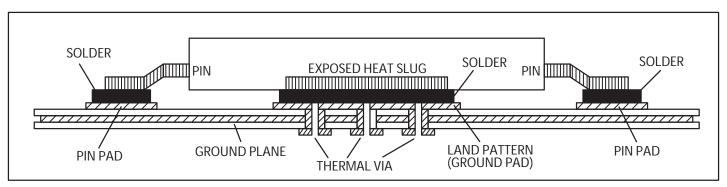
Assembly for Exposed Pad Thermal Release Path - Side View (drawing not to scale)
